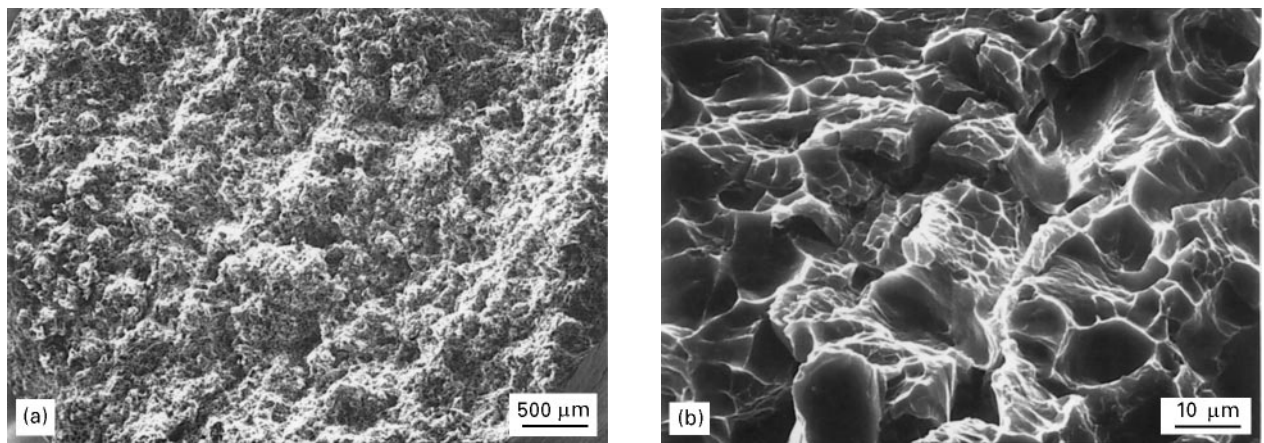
(a, b) SEM images of fatigue fracture surface of the extruded material.
